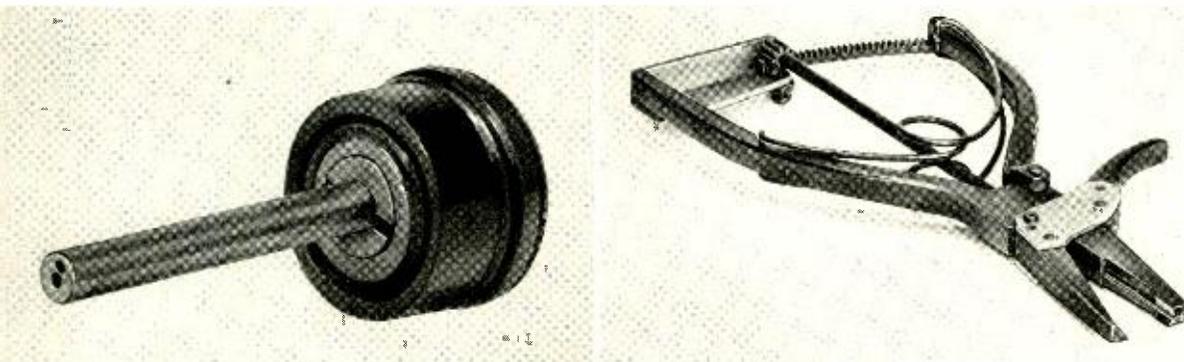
(left)—The original wrapping tool was a simple rod with two holes in the end. Fig. 3 (right)—A pair of pliers was modified to make a wrapping tool.
